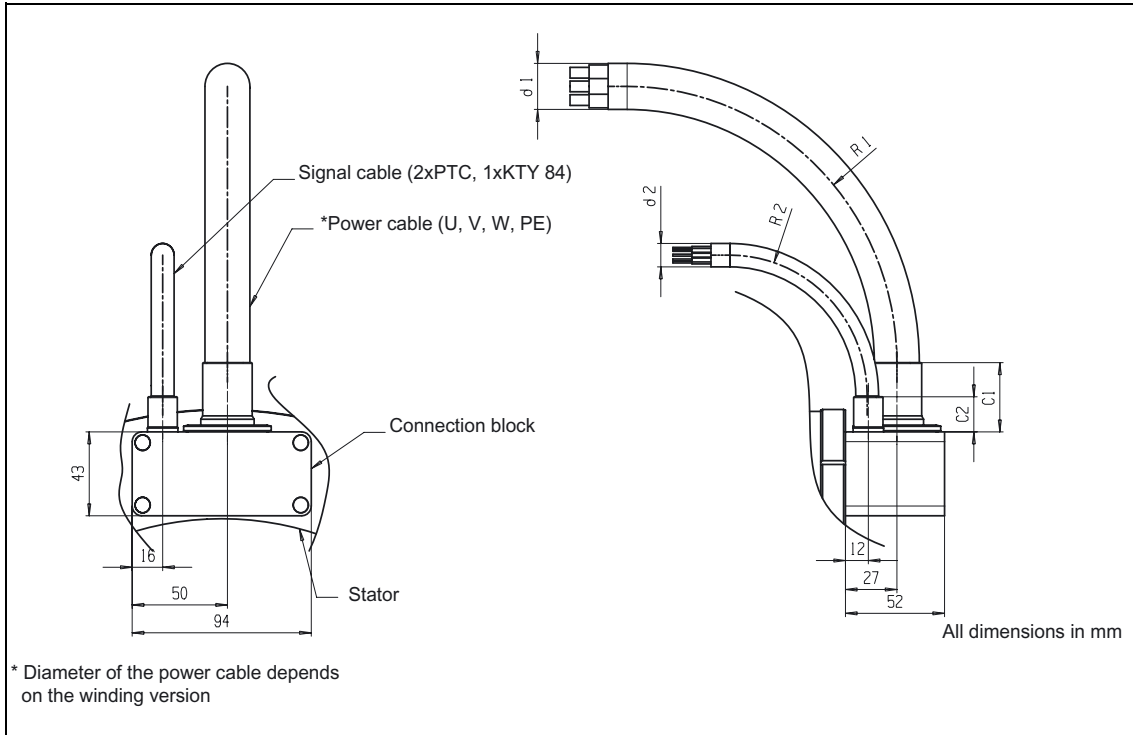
Radial electrical connection with sleeve for 1FW6160, 1FW6190 and 1FW6230 from 10 mm² conductor cross-section (motor type B)
